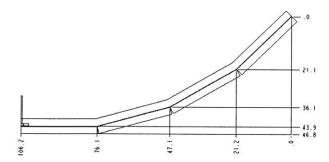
Dimensioned side view of 1999 Contest Table.
